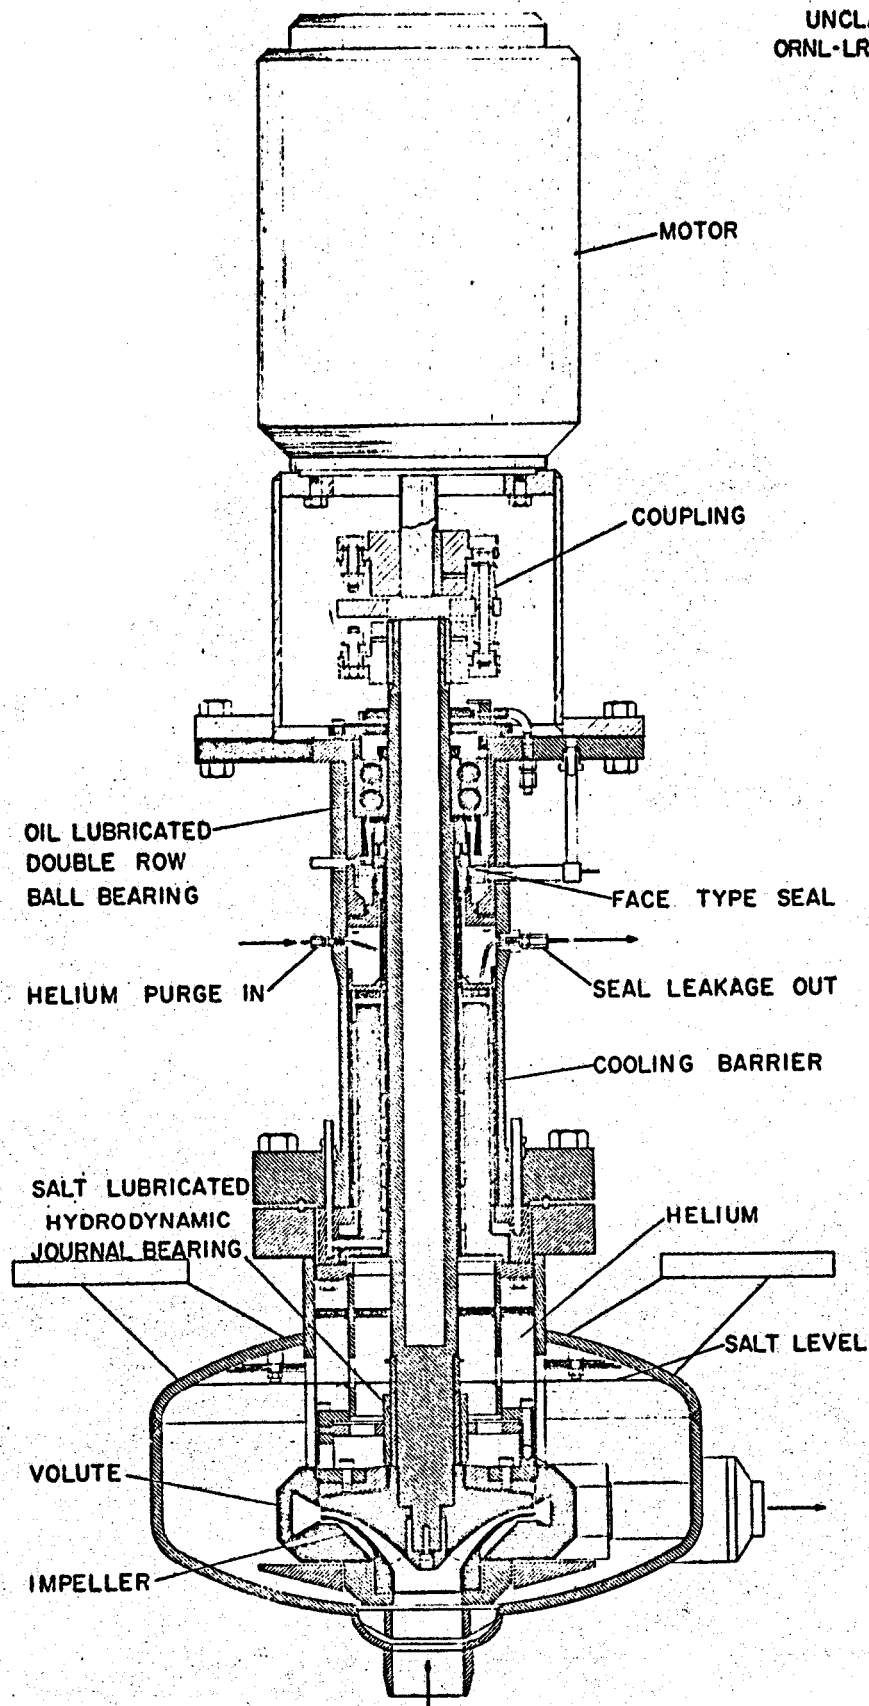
Molten Salt Pump with Salt Lubricated Bearing
